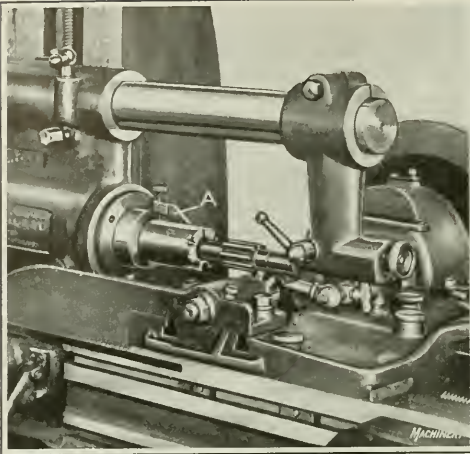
Pinion held between Centers and aligned by Lever A engaging Keyway
